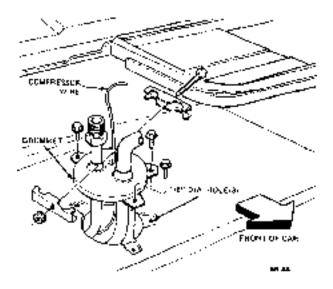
B-65 Inlet and Outlet Pipes retainer and Rubber Grommet-Opel 1900 'Manta
